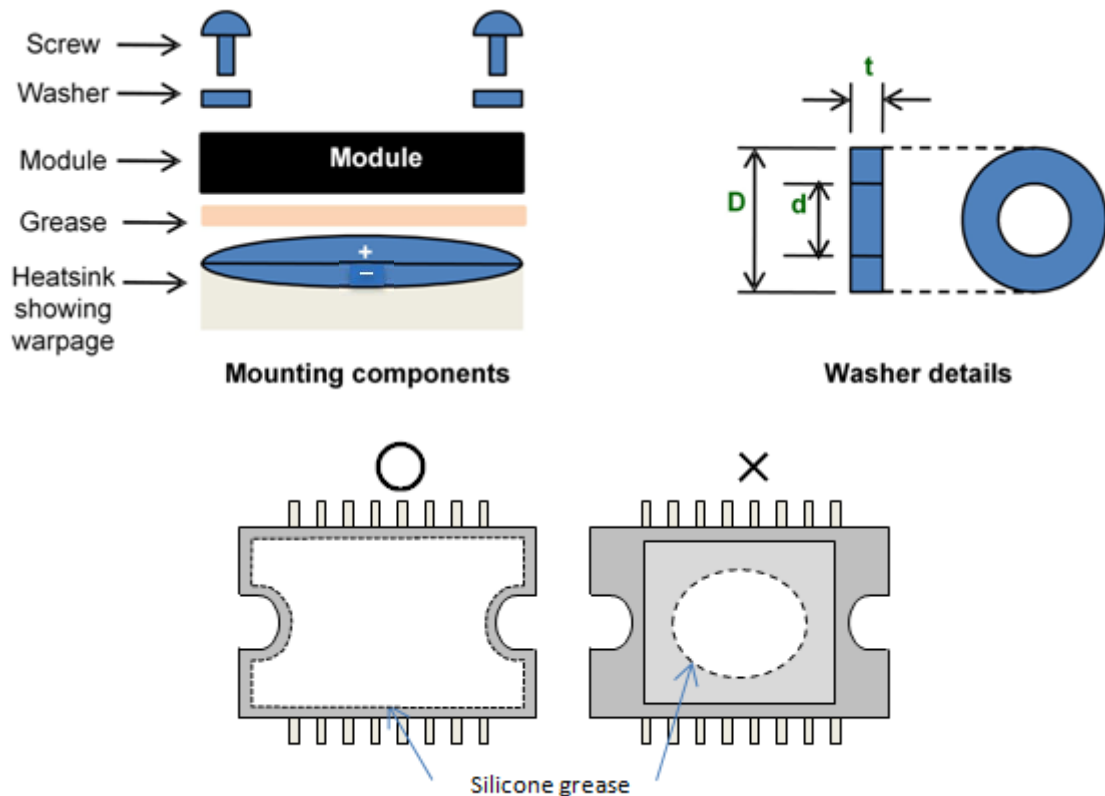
Module Mounting details: components; washer drawing; need for even spreading of thermal grease
